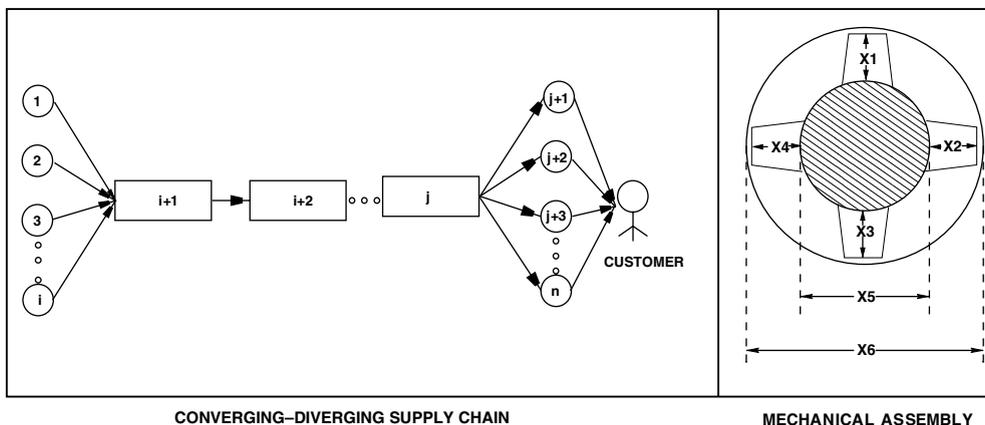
An analogous mechanical assembly for a converging–diverging supply chain.
